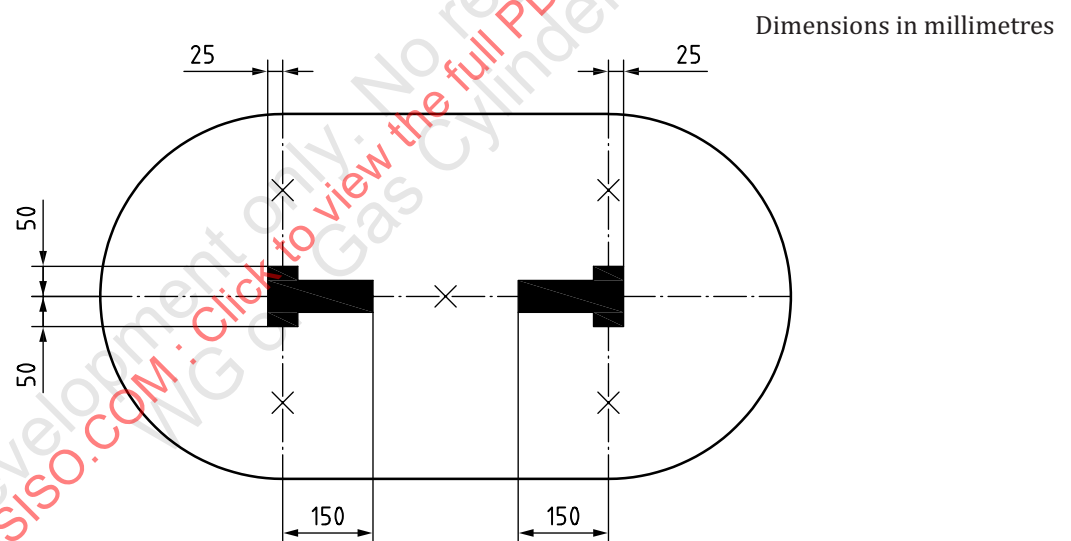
Extent of radiography of welds (black sections in the figure) — Cylinders with circumferential and longitudinal welds
